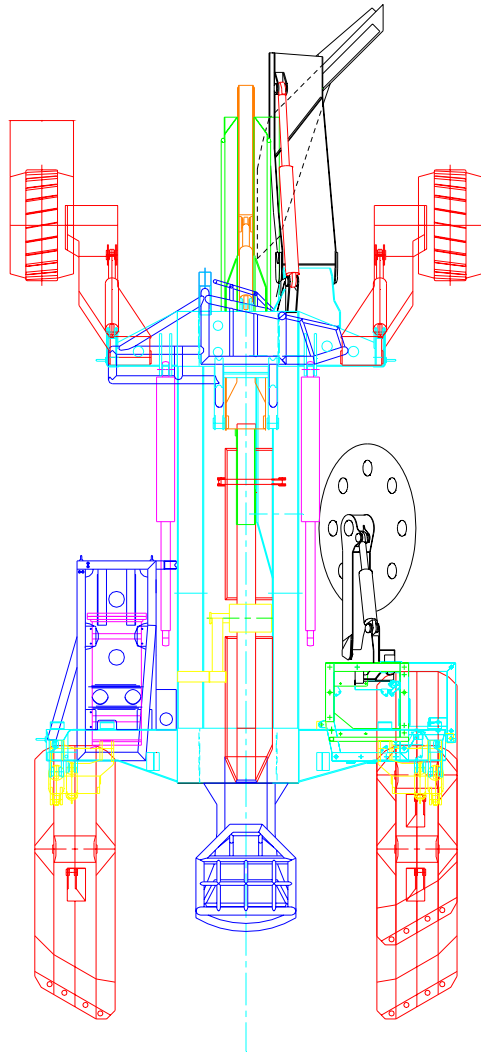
Plan View of Plough (PF6438C Issue 1)
